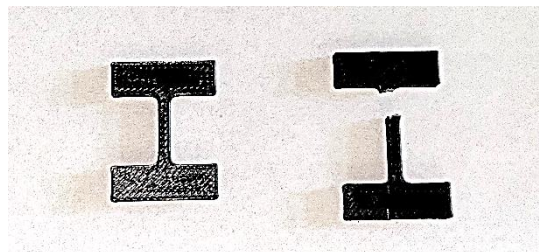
Example of a mini-specimen broken during tensile testing on the designed and fabricated equipment (mini-specimen no. 1, with 15% infill), Adapted from van Zyl *et al.* (2016).
